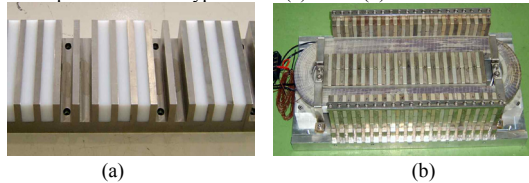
E-shaped mover core type TFLM (a) stator (b) mover
